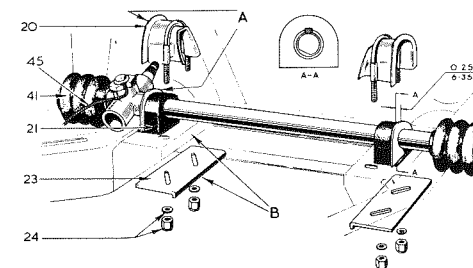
When securing the clamp/mounting plates ensure that the mounting plates butt up against the chassis and that the bush is firmly within the clamp as shown in the schematic.
